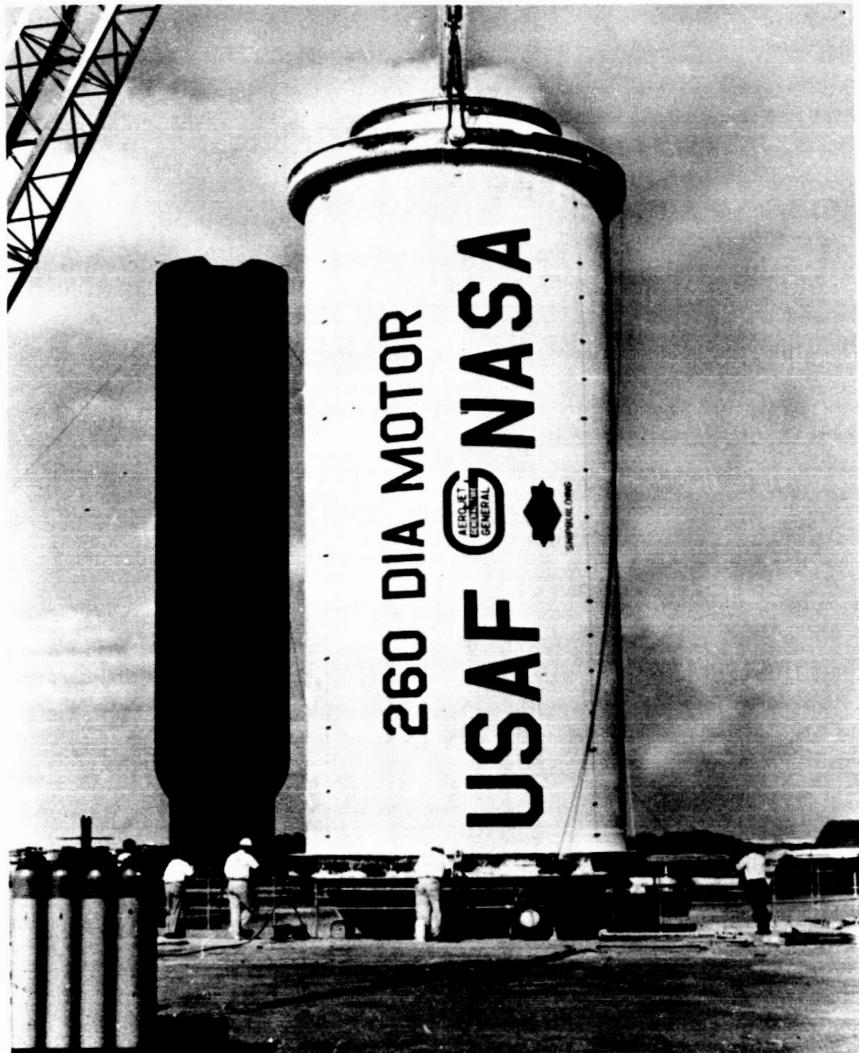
260-inch motor case being lowered into firing pit before loading with propellant. Casting mandrel to left of casing.
